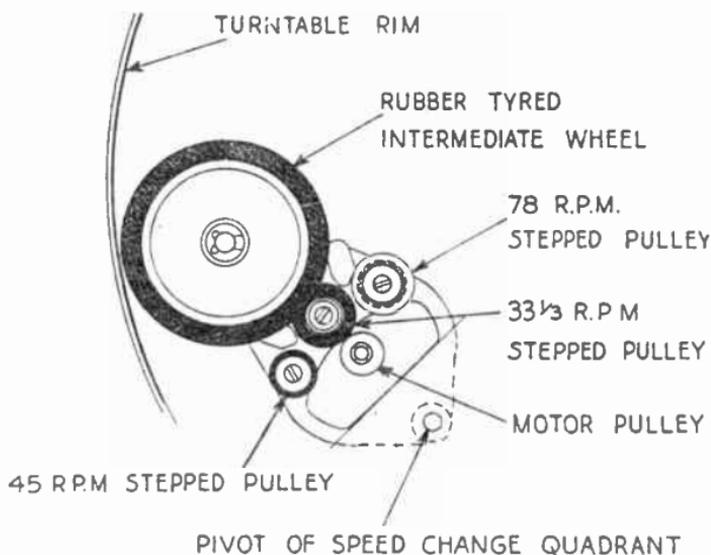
THREE-SPEED DRIVE USING THREE STEPPED PULLEYS.
